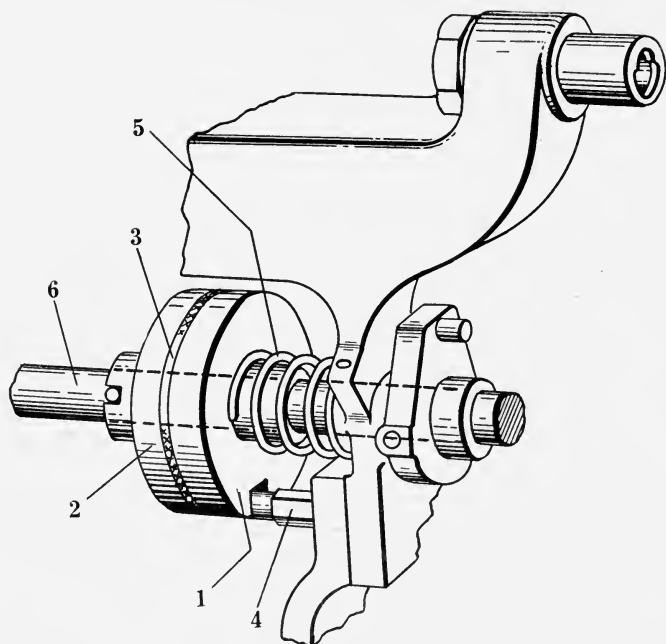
New Style Mold Disk Brake. This is the new style device employed to clamp the mold disk driving pinion shaft. The disk 2 is pinned to the shaft 6 and a leather disk is interposed between the rear disk 2 and the front disk 1. A spring 5 constantly urges the front disk against the leather lining 3 and the rear disk 2, which is free to revolve as the shaft revolves. The front disk 1 is stationary upon the shaft, being held by the pin 4 in the mold gear arm support. There are no adjustments to be looked after.
